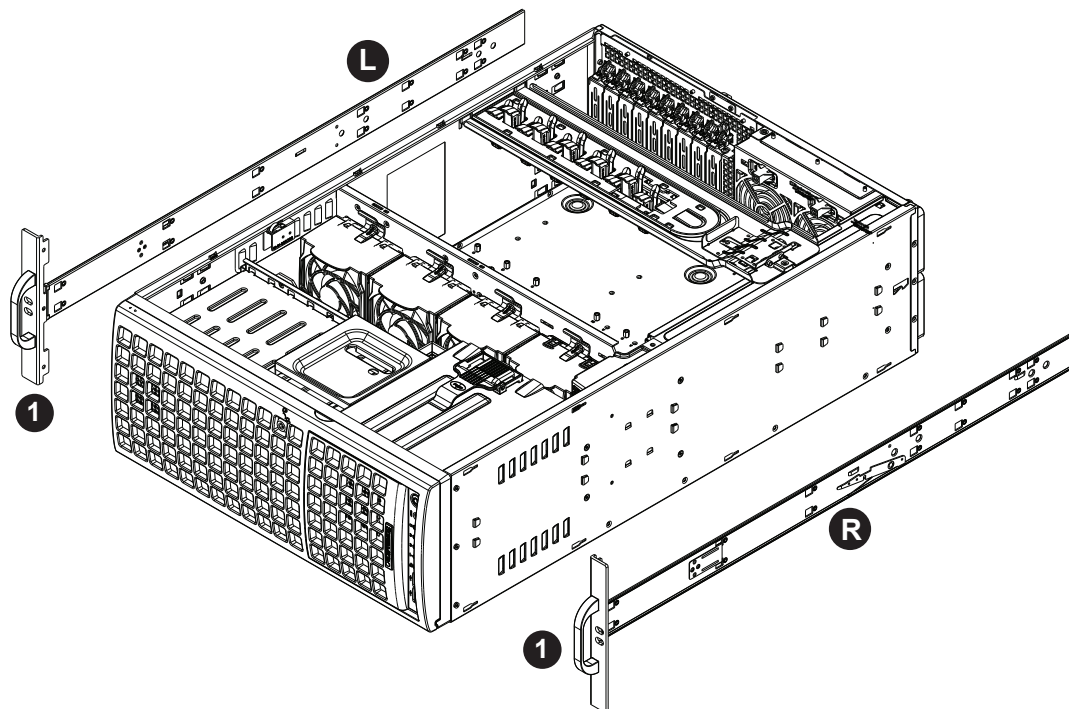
Installing the Handles and Inner Rails to the Chassis
